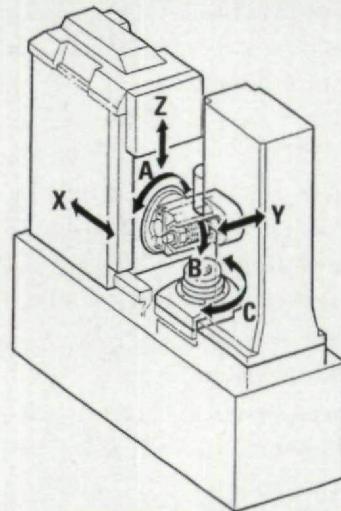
Typical 6-axis machine. X = radial; Y = tangential; Z = axial; A = hobhead swivel; B = hob spindle; C = worktable. (Courtesy of NUM Corporation. Used with permission.)
